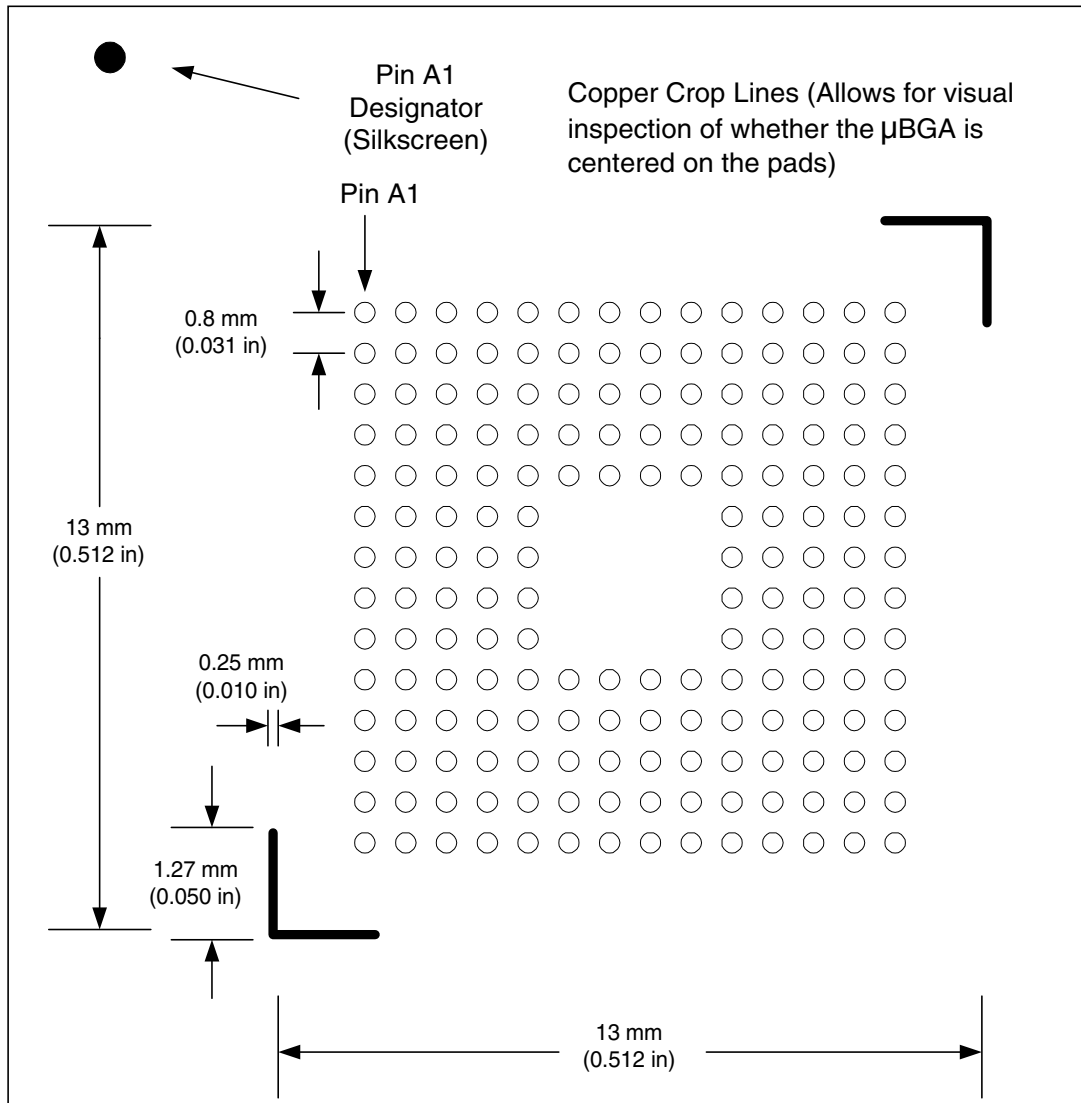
180-Pin μ BGA PCB Layout Suggested Land Pattern
